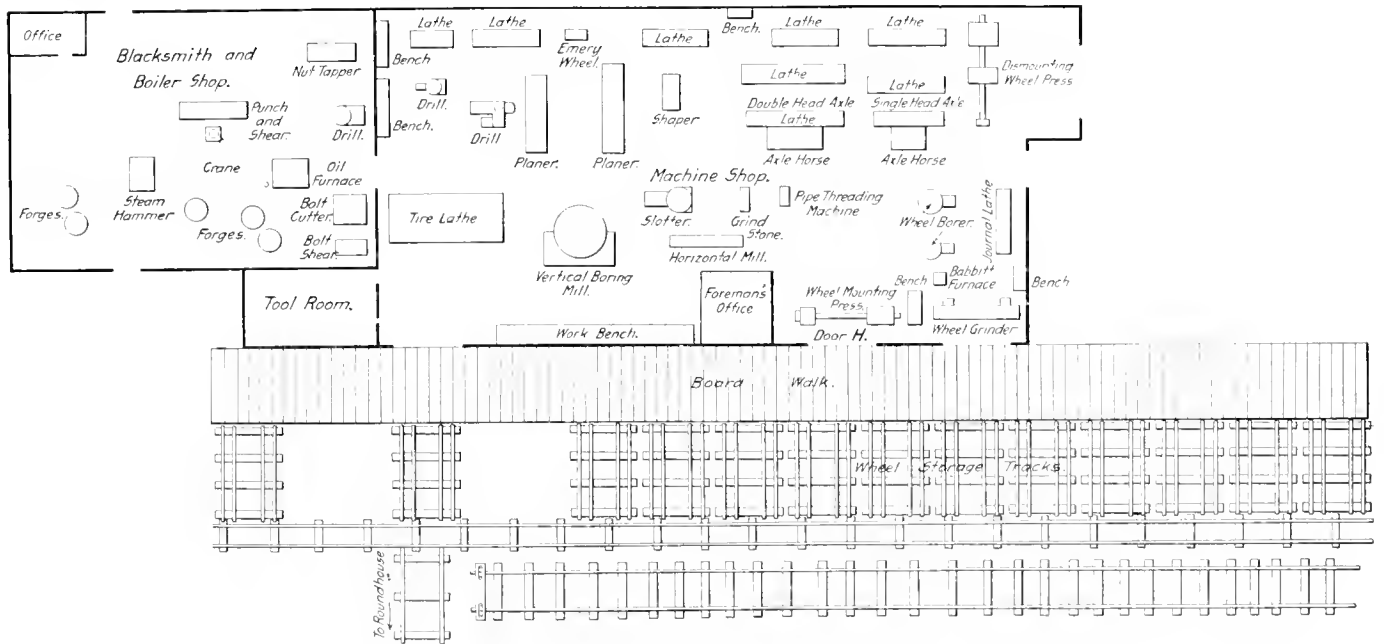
Layout of Machines in Machine, Blacksmith and Boiler Shops.
